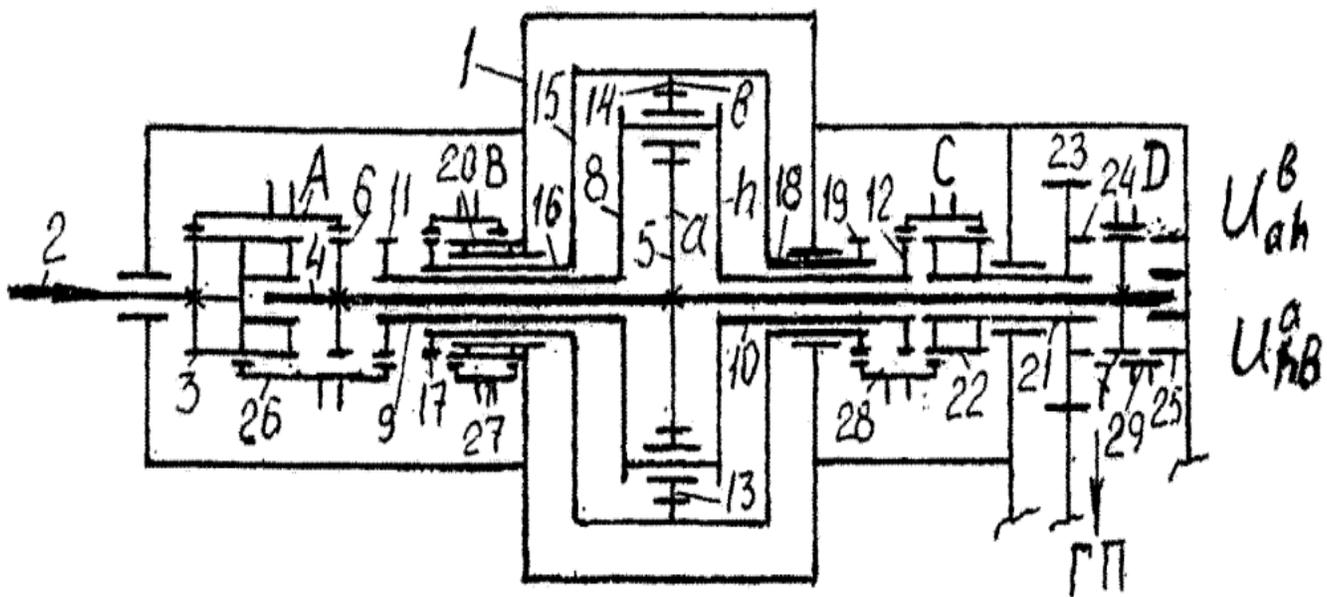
Schematic view of GB with simple three-link 5R1 PGT[12]
